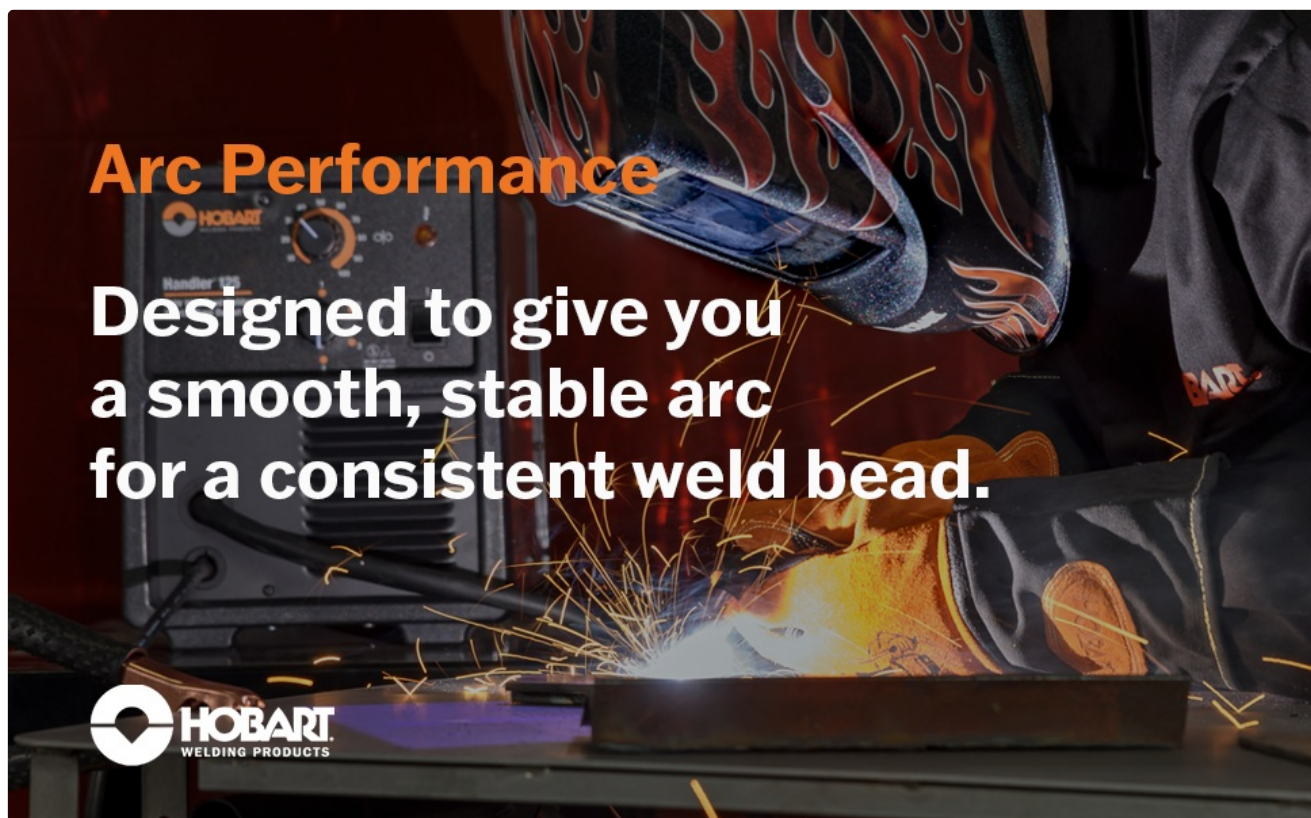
Visual representation of the Handler 190's arc performance, designed for smooth and stable welding.
